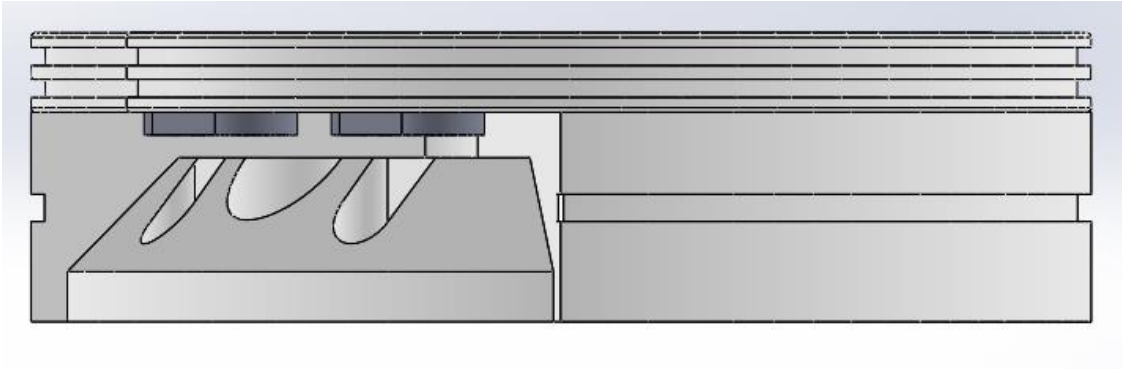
Two Parts of the Piston Assembled with Piston's Guides (Side View)
